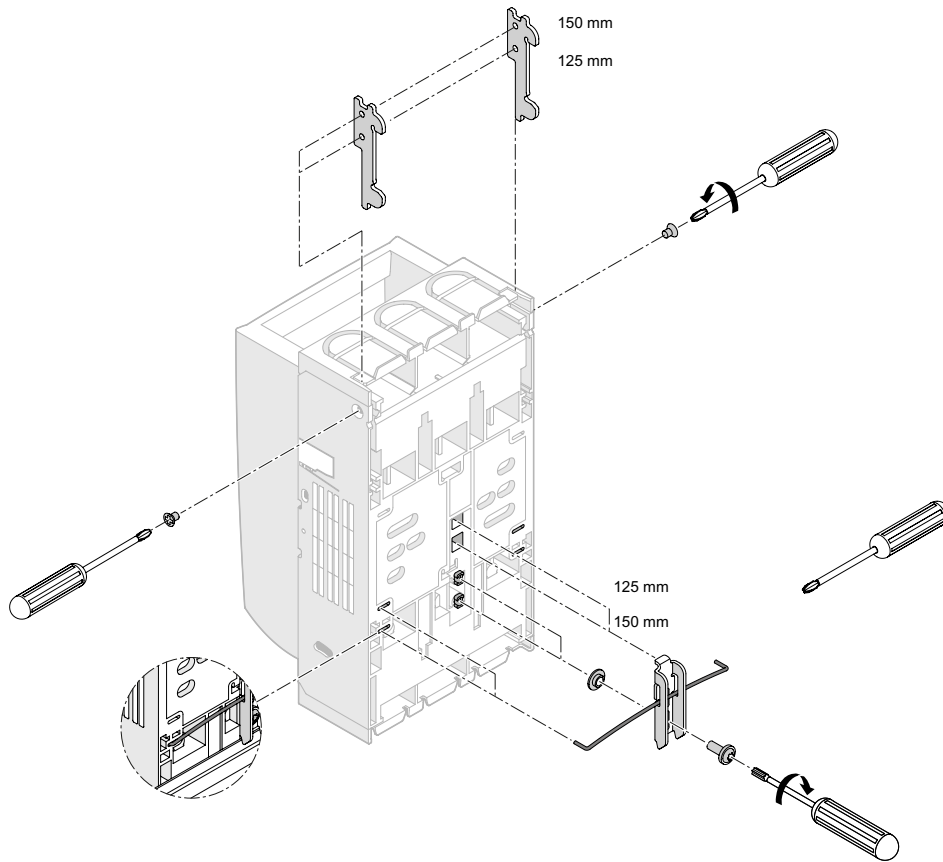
Mounting the fuse switch disconnecter, sizes 00 and 1 onto a standard rail (1)
